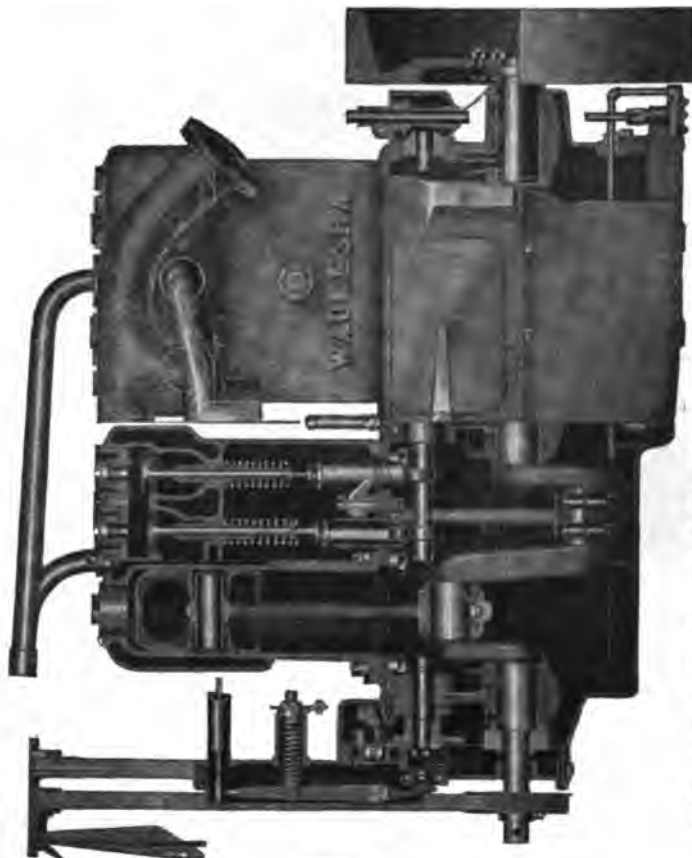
Sectional side view of Waukesha 4 cyl. engine, showing operation and interior construction. Note governor fulcrum and oil pump, latter being at lower fly wheel end.
